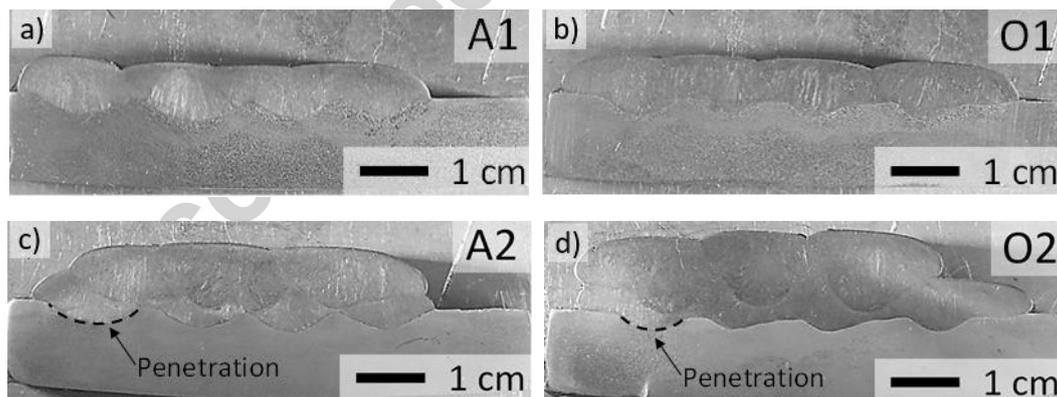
Transverse sections of welded coupons: one layer welded with a) Ar-20CO<sub>2</sub> and b) without shielding gas; two layer welded with c) Ar-20CO<sub>2</sub> and d) without shielding gas.
